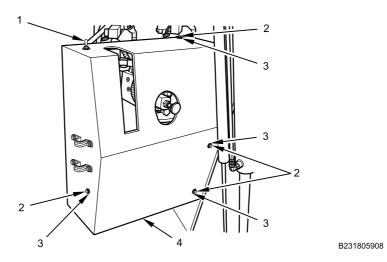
Rear Door/Ramp Hydraulic Pump Cover Removal.
